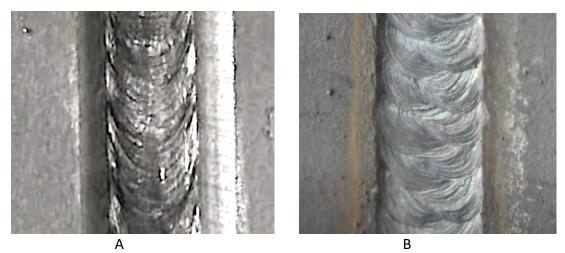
(A) a Stringer Bead Weld showing ripple patterns that appear as a single row of crescents, sometimes called stack of dimes (Collier, 2015, 2:24)<sup>1</sup>. (B) a Weave Bead Weld showing ripple patterns that appear as a parallel (side by side) row of overlapping crescents: side by side crescents overlapping within the single weld bead (Collier, 2015, 4:10)<sup>1</sup>.
